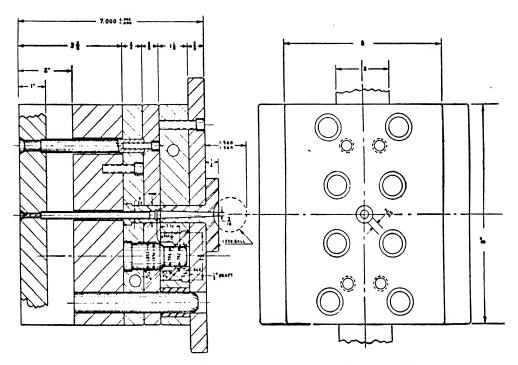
Four-cavity injection mold for producing a bushing.
